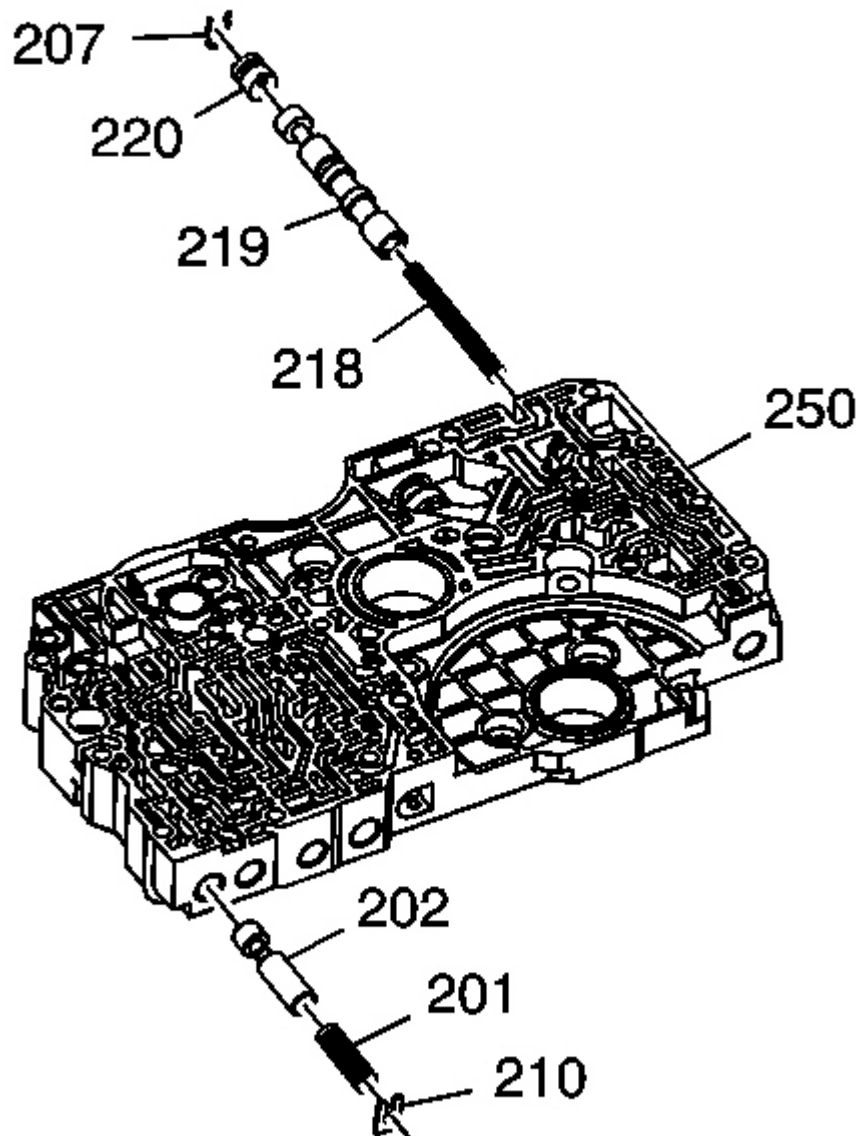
Main Control Valve Body, Bore Plug, Retainer Clip, Lock-Up Shift Valve & Return Spring
